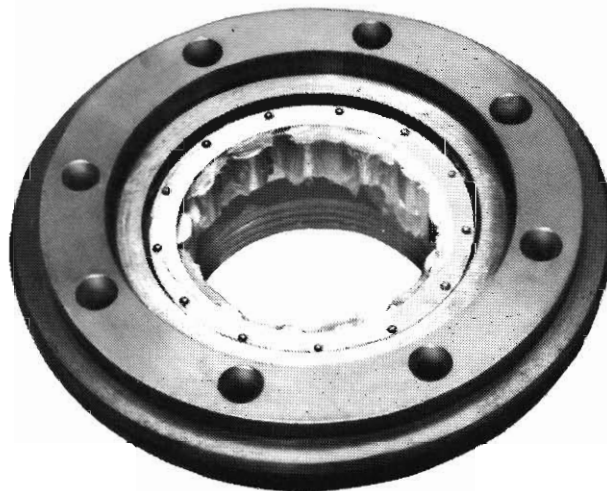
Bearing Pressed Into Commutator End Bearing Housing 23323
